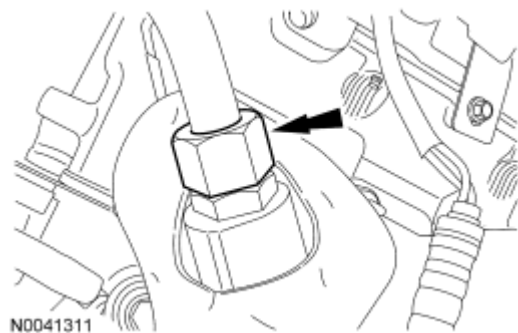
Locating EGR Tube Nut At RH Exhaust Manifold
